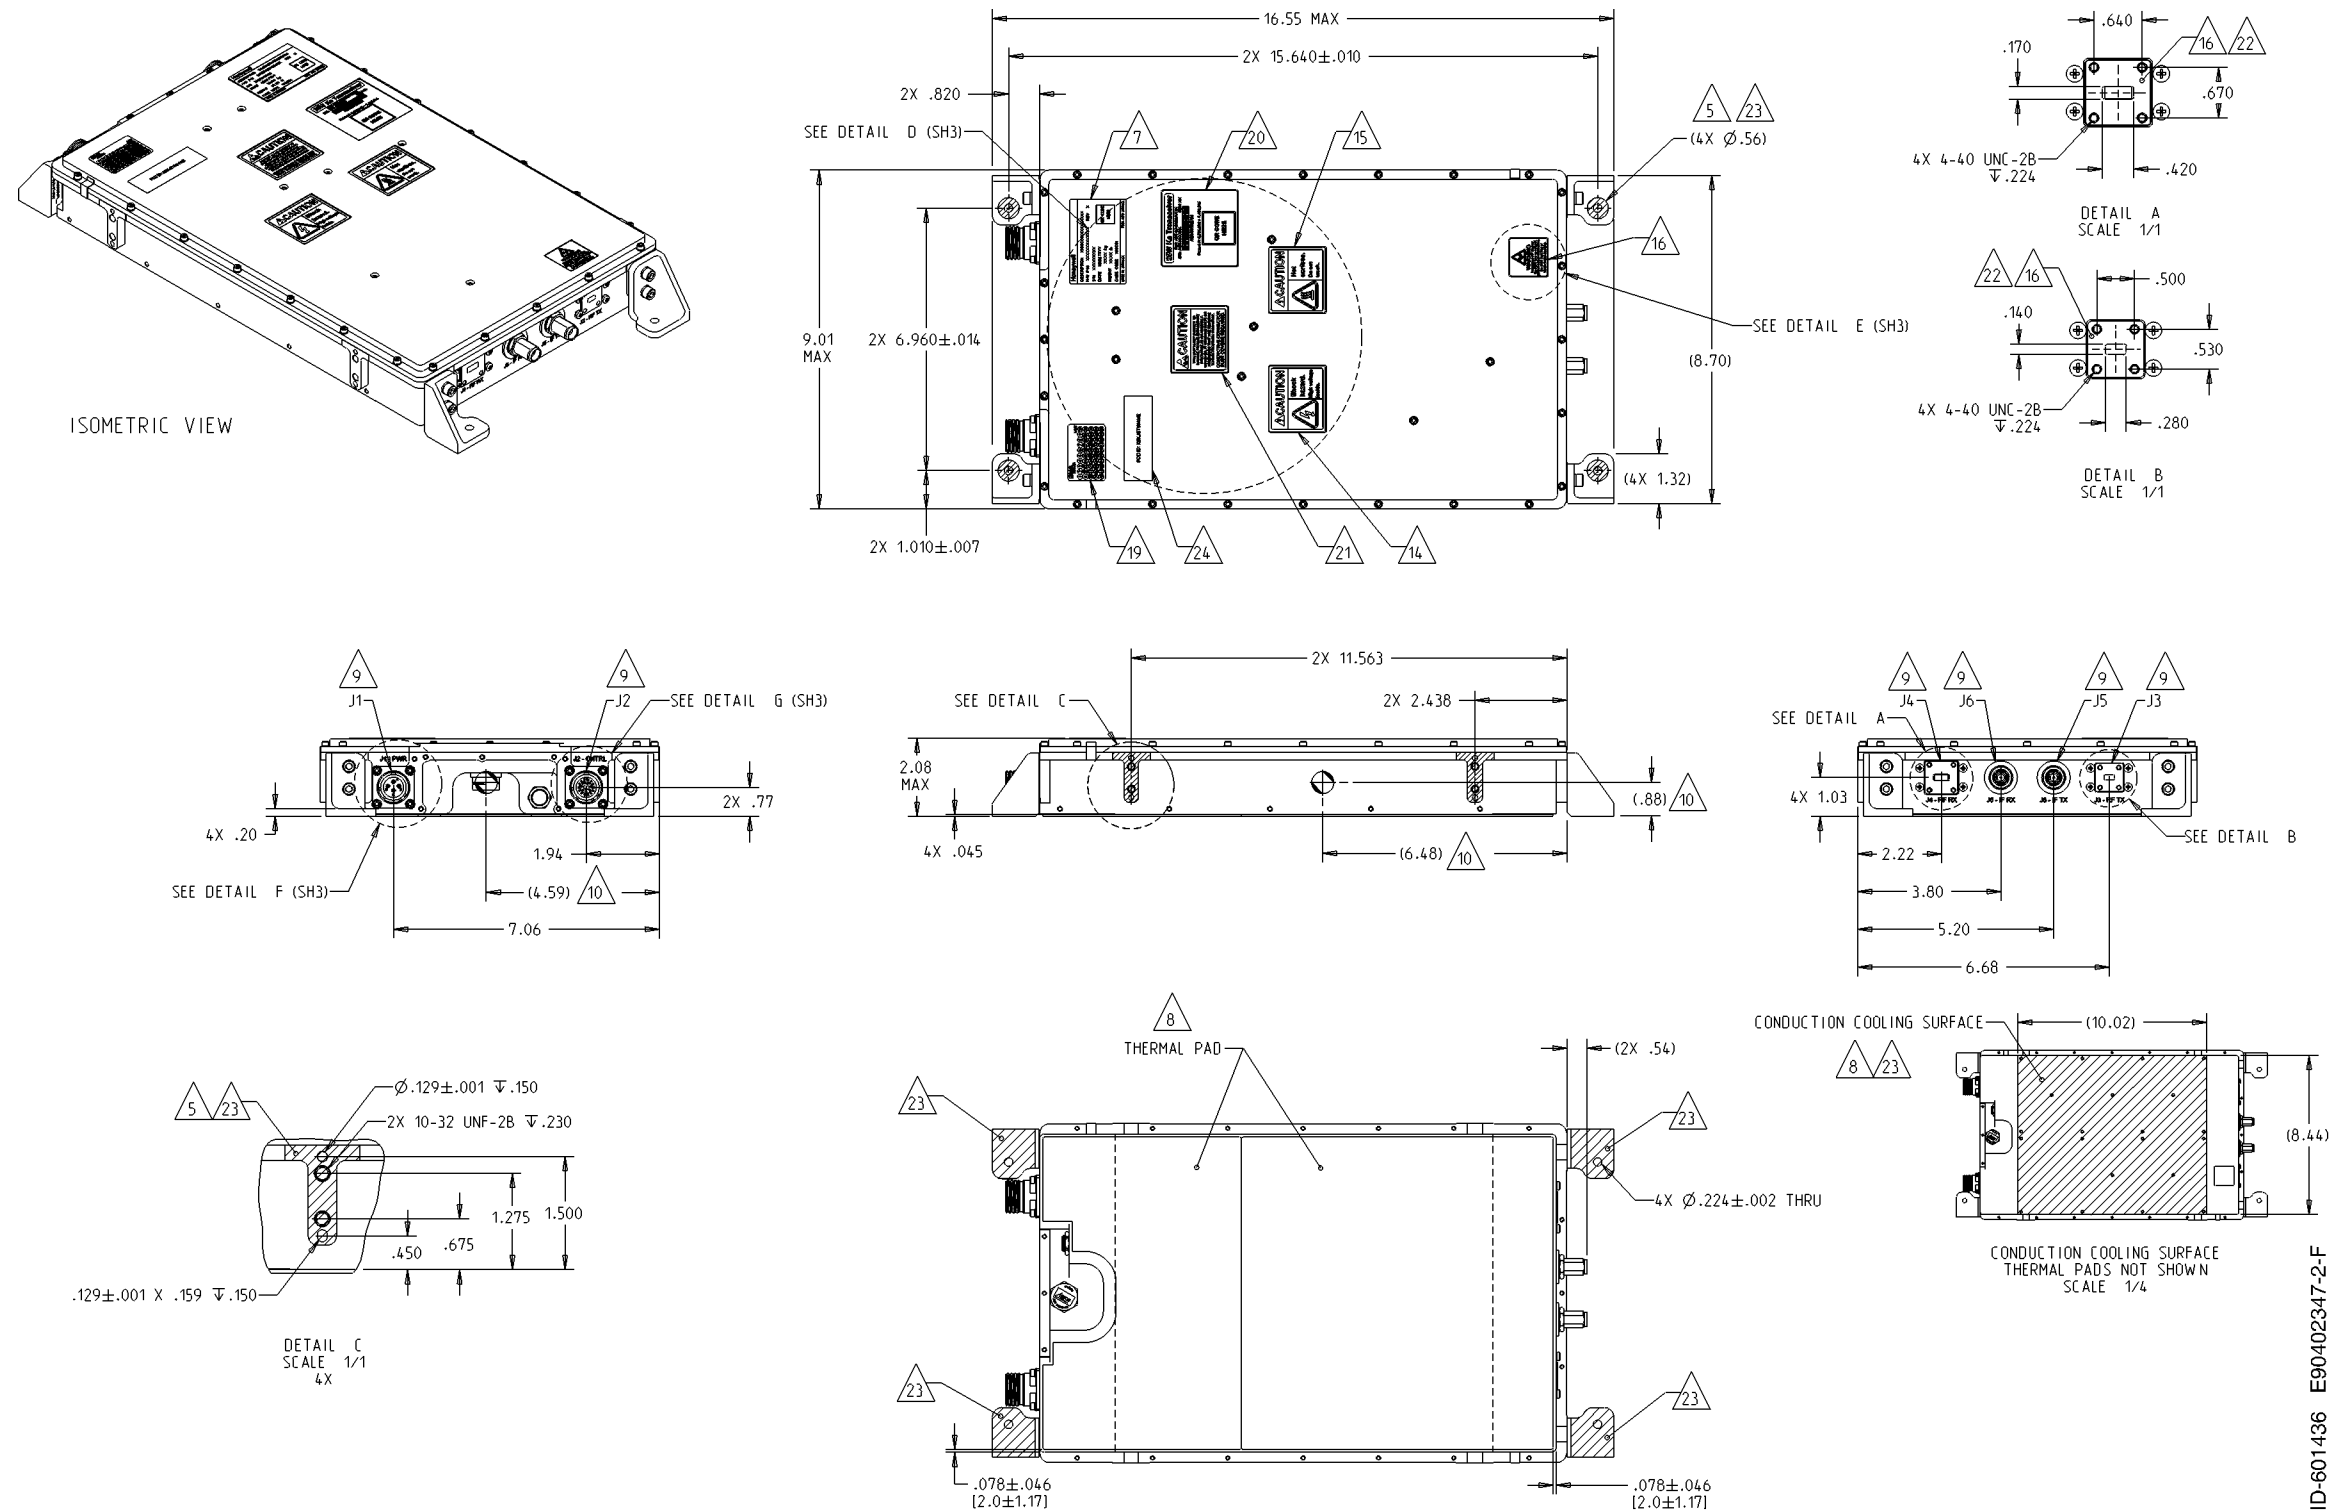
(Sheet 2 of 3) KRFU, Conduction-Cooled 2, Outline and Installation Drawing (90402347, REV F)
